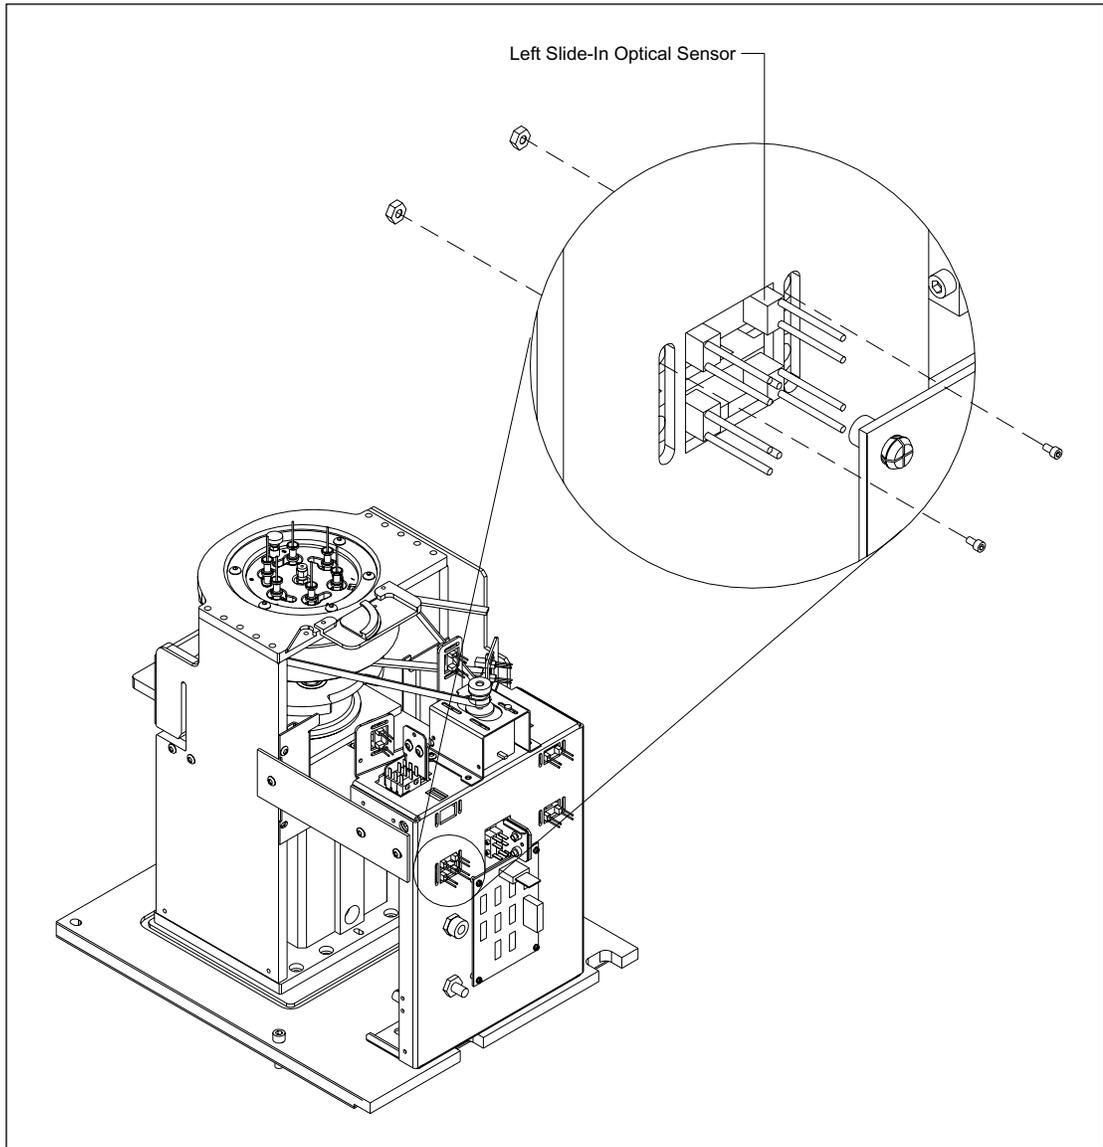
Anode Left Slide-In Sensor Mounting.
